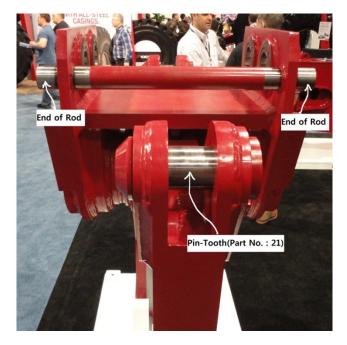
Approach the Processor with the Machine from the Rod Side of the Coupler.
